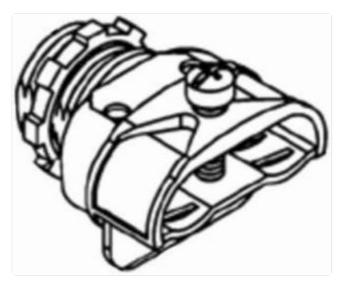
Technical diagram illustrating the internal structure and cable clamping mechanism of the connector.
